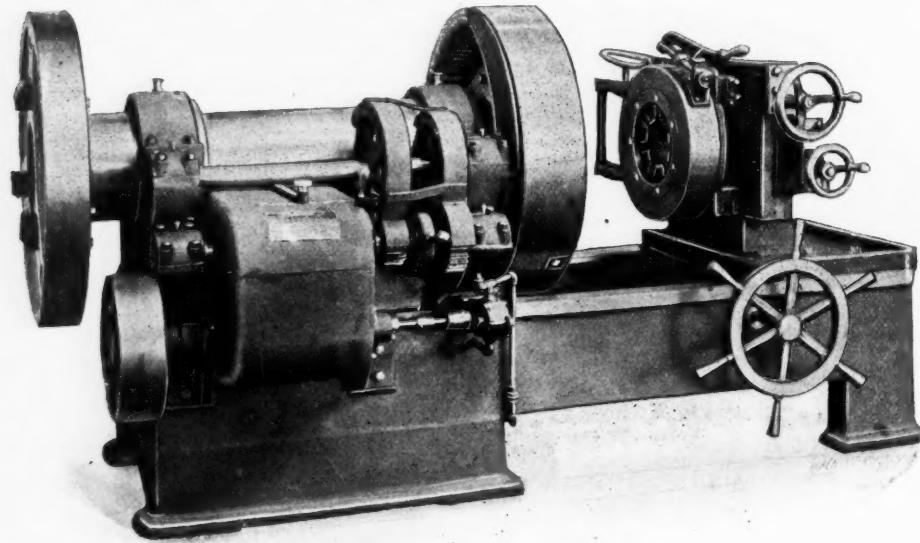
The Stoever 1909 Model, Geared Drive, Pipe Threading and Cutting-off Machine
